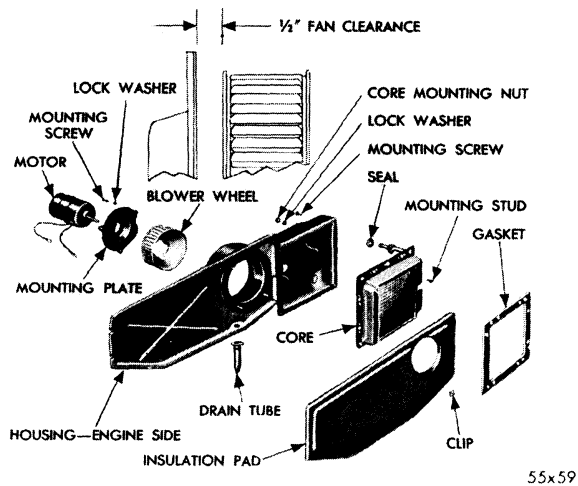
Blower and Motor Assembly, Heater Core and Insulation to Heater Housing (Engine Side)
